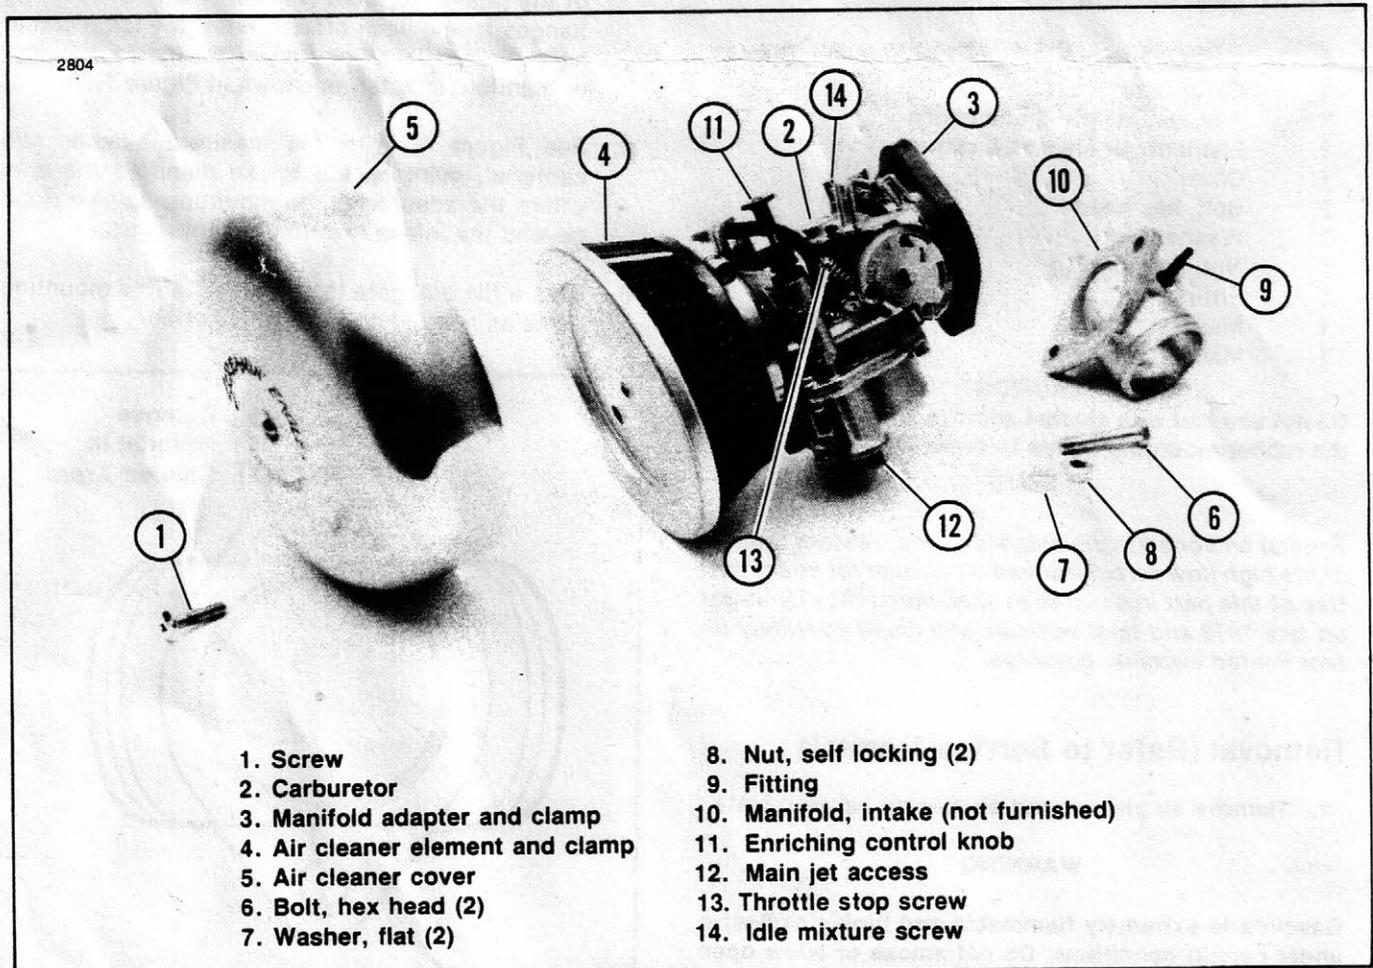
High Flow Carburetor and Air Cleaner Assembly
